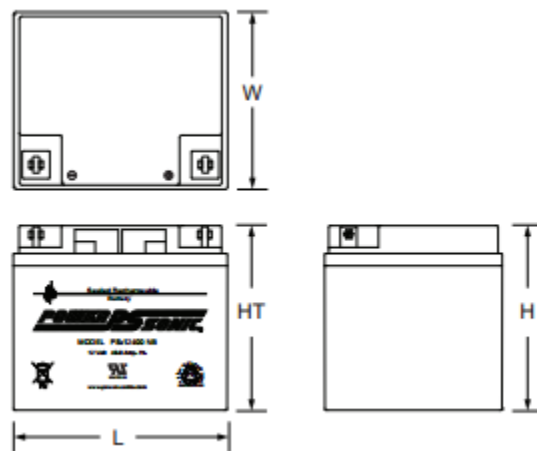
Battery Dimensions (L: 7.76in. W: 6.5in. HT: 6.69in.)
